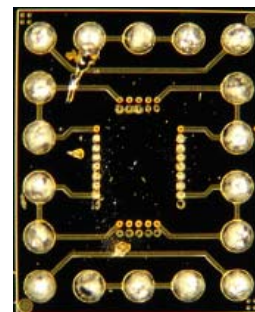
Destructive Failure Analysis of Quadrant 1 Failed Assembly
